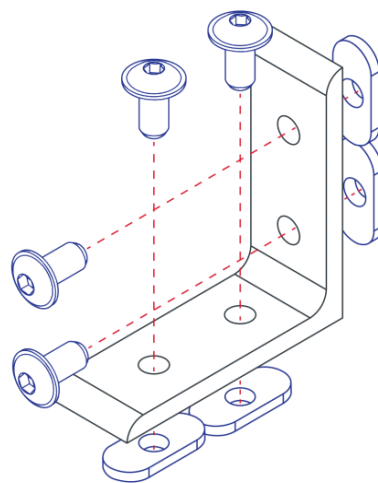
Diagram of how supporting rails will be secured with a raised perpendicular mount and socket head screws [35] [36]
